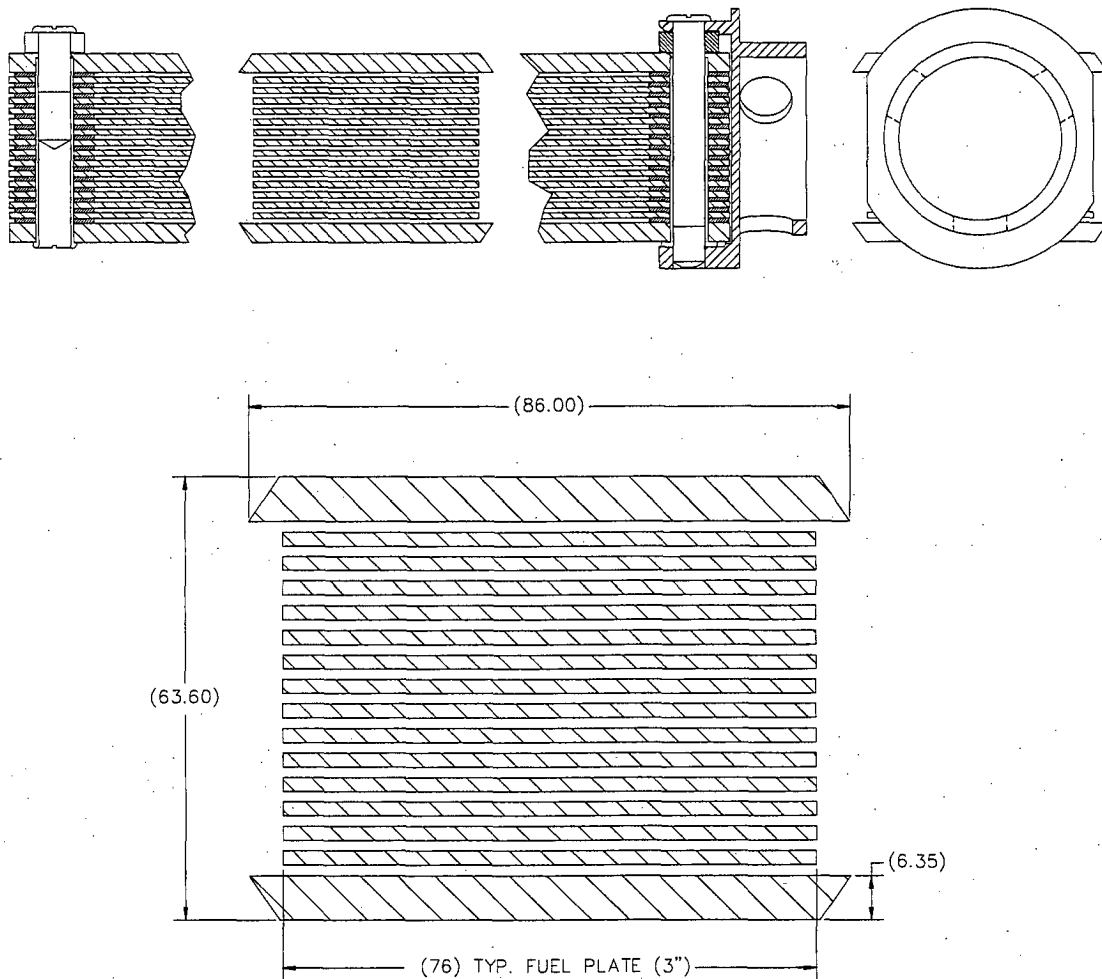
Spiral Fuel Assembly Cross-Section Sketch
